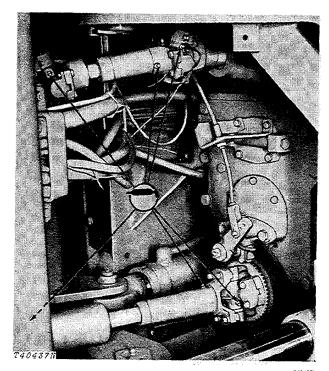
Winch Drive Line and Lower Telescoping Universal Joints (6 Points)
